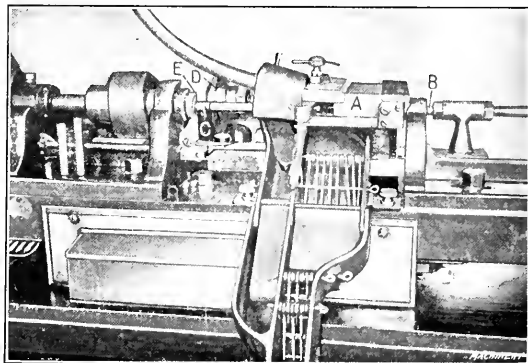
Close View of One of the Automatic Trimming Machines shown in Fig. 8
